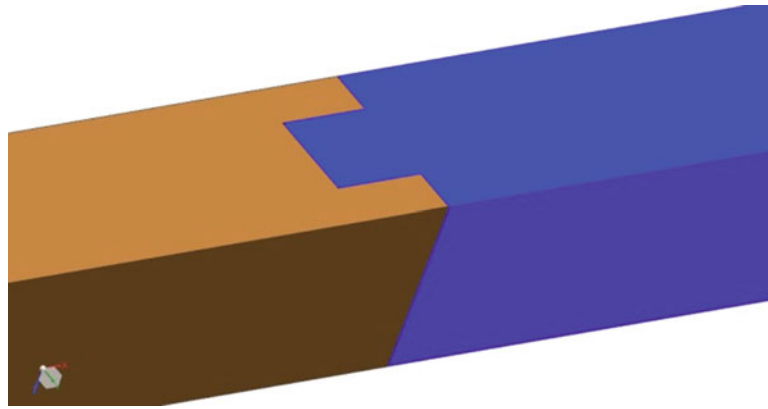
Hybrid joining using mechanical interlocks and adhesive bonding
